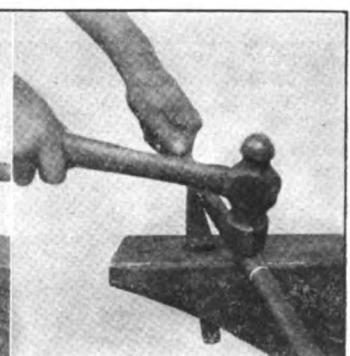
AFTER CUTTING THE STOCK IS BROKEN ON THE ANVIL EDGE
